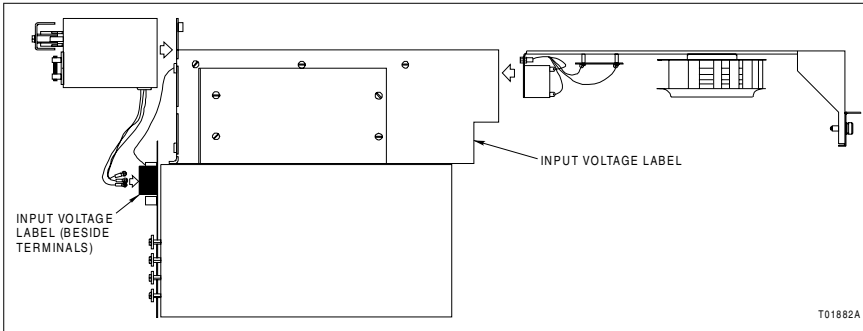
Fan Assembly and Power Entry Circuit Breaker or Switch Installation (Side View)
